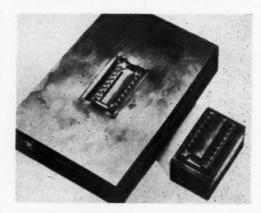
A hob and a hobbed (but unmachined) insert of type 2365 molybdenum steel for a multi-cavity die for pressure casting safety razor parts in zinc-base alloy
